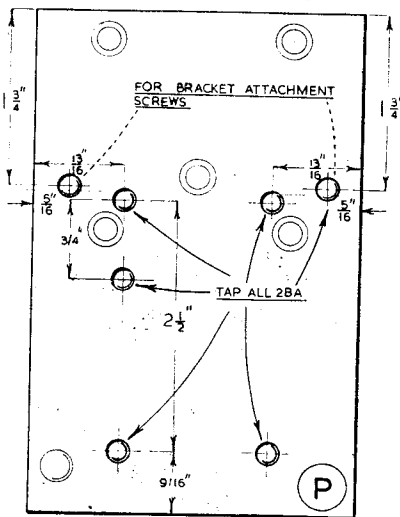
The motion-plate with the screw holes for the slide-bars and bearing bracket added
